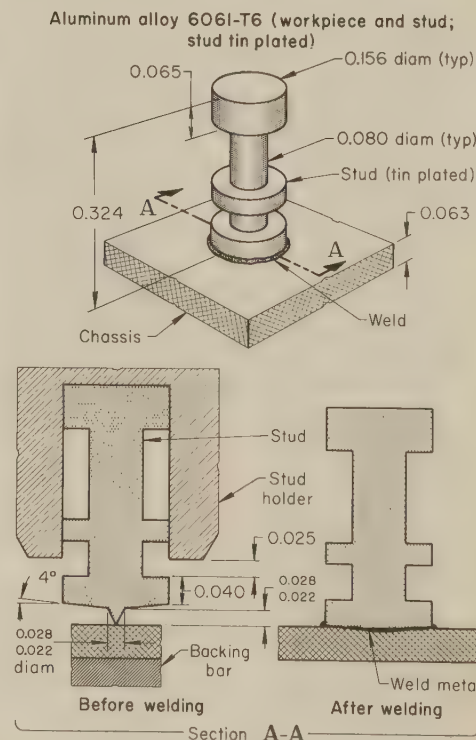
Tin-plated 6061-T6 stud that was capacitor-discharge stud welded to a 6061-T6 electronic chassis (Example 174)
